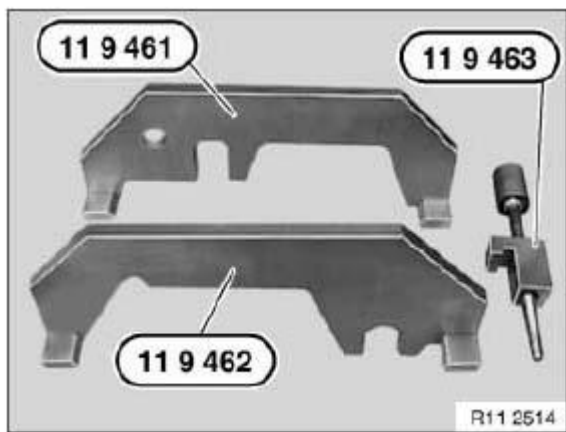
Identifying Special Tool (11 9 461), (11 9 463) And (11 9 462)
